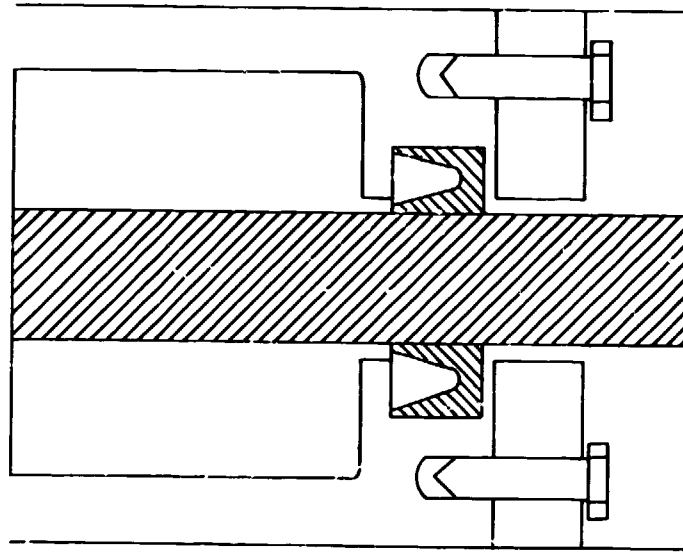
U-Ring Seal for a Hydraulic Actuator Rod
